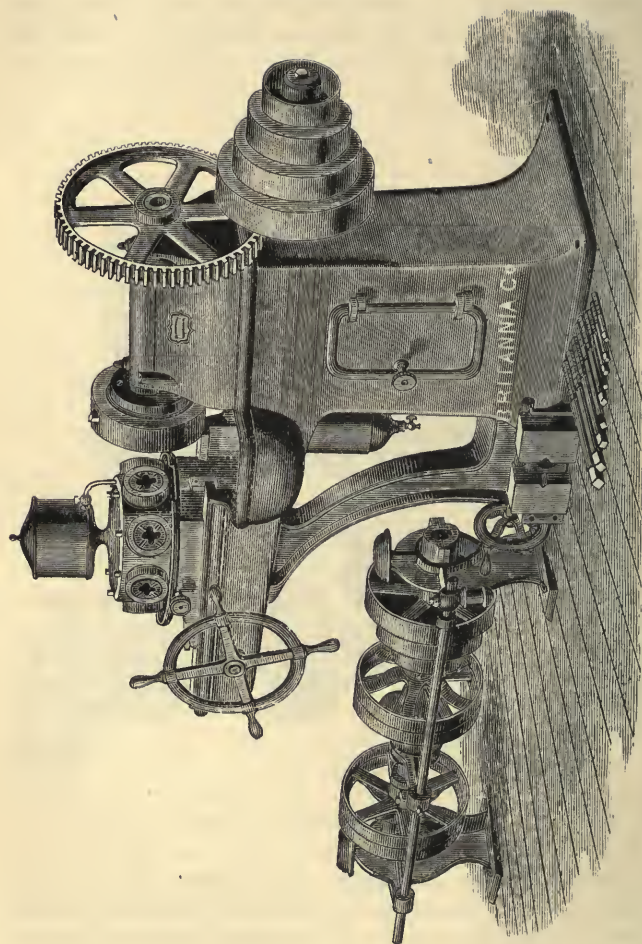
BOLT-THREADER WITH TURRET-HEAD.
